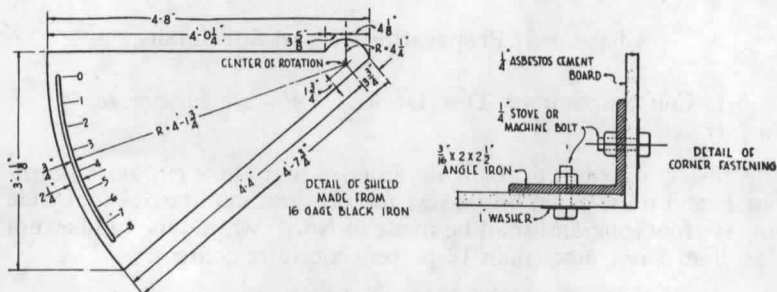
(Continued). Detail of Tilting Frame to Hold Test Roof Deck.
